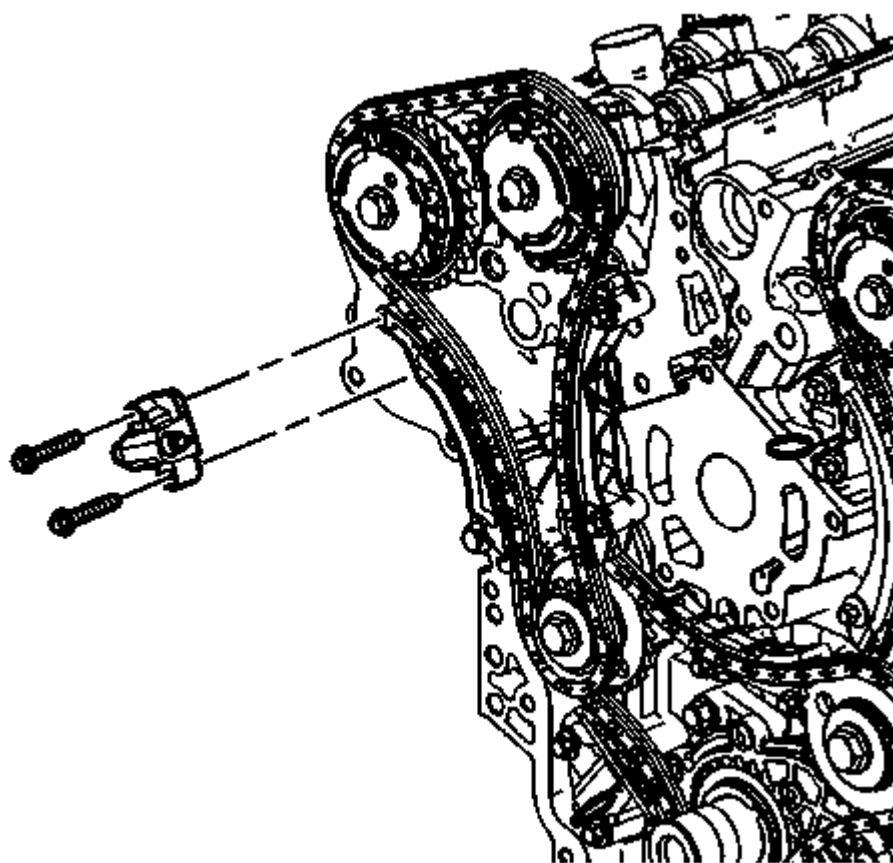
View Of Right Bank Secondary Camshaft Drive Chain Tensioner
